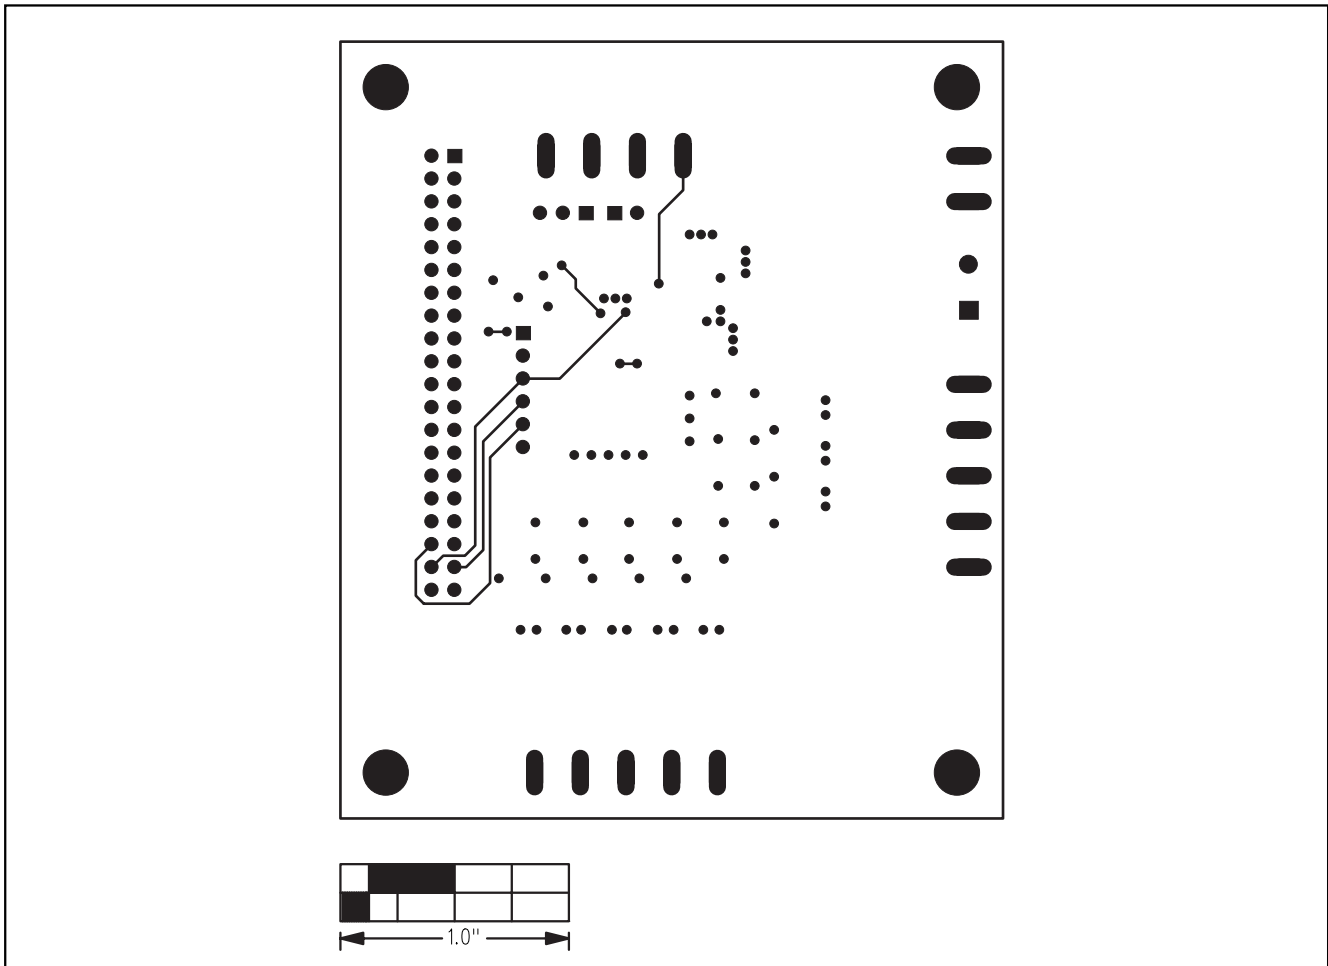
MAX1168 EV Kit PC Board Layout—Solder Side
